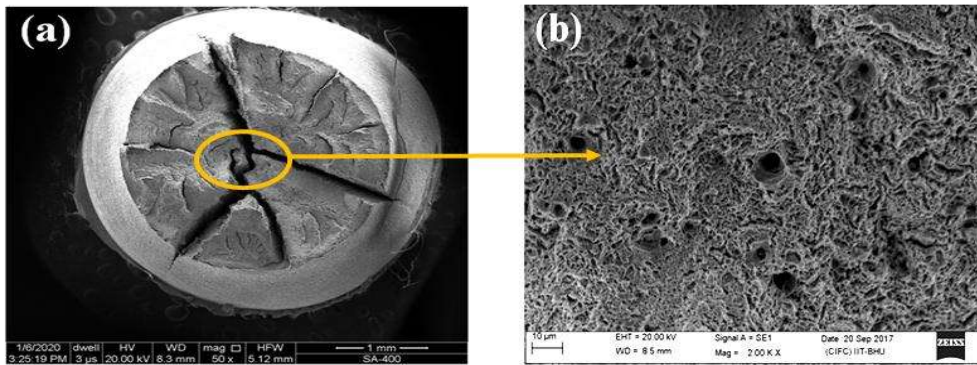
Fractographs of the un-ratcheted tensile tested specimen of modified 9Cr-1Mo steel
